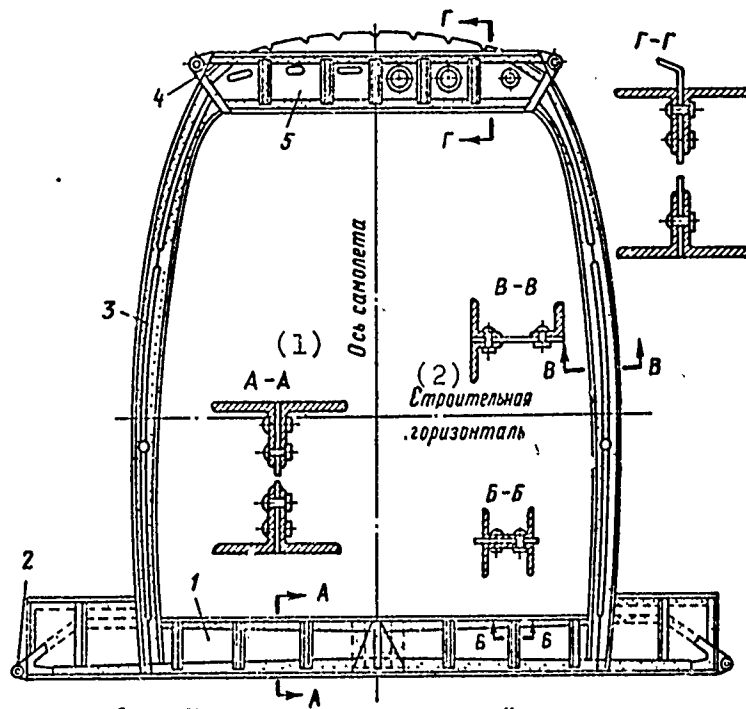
Attachment frame No. 6: 1 - bottom part of frame (forward spar of wing center section); 2 - lower wing mounting lug; 3 - side wall of frame; 4 - upper wing mounting lug; 5 - top part of frame.
